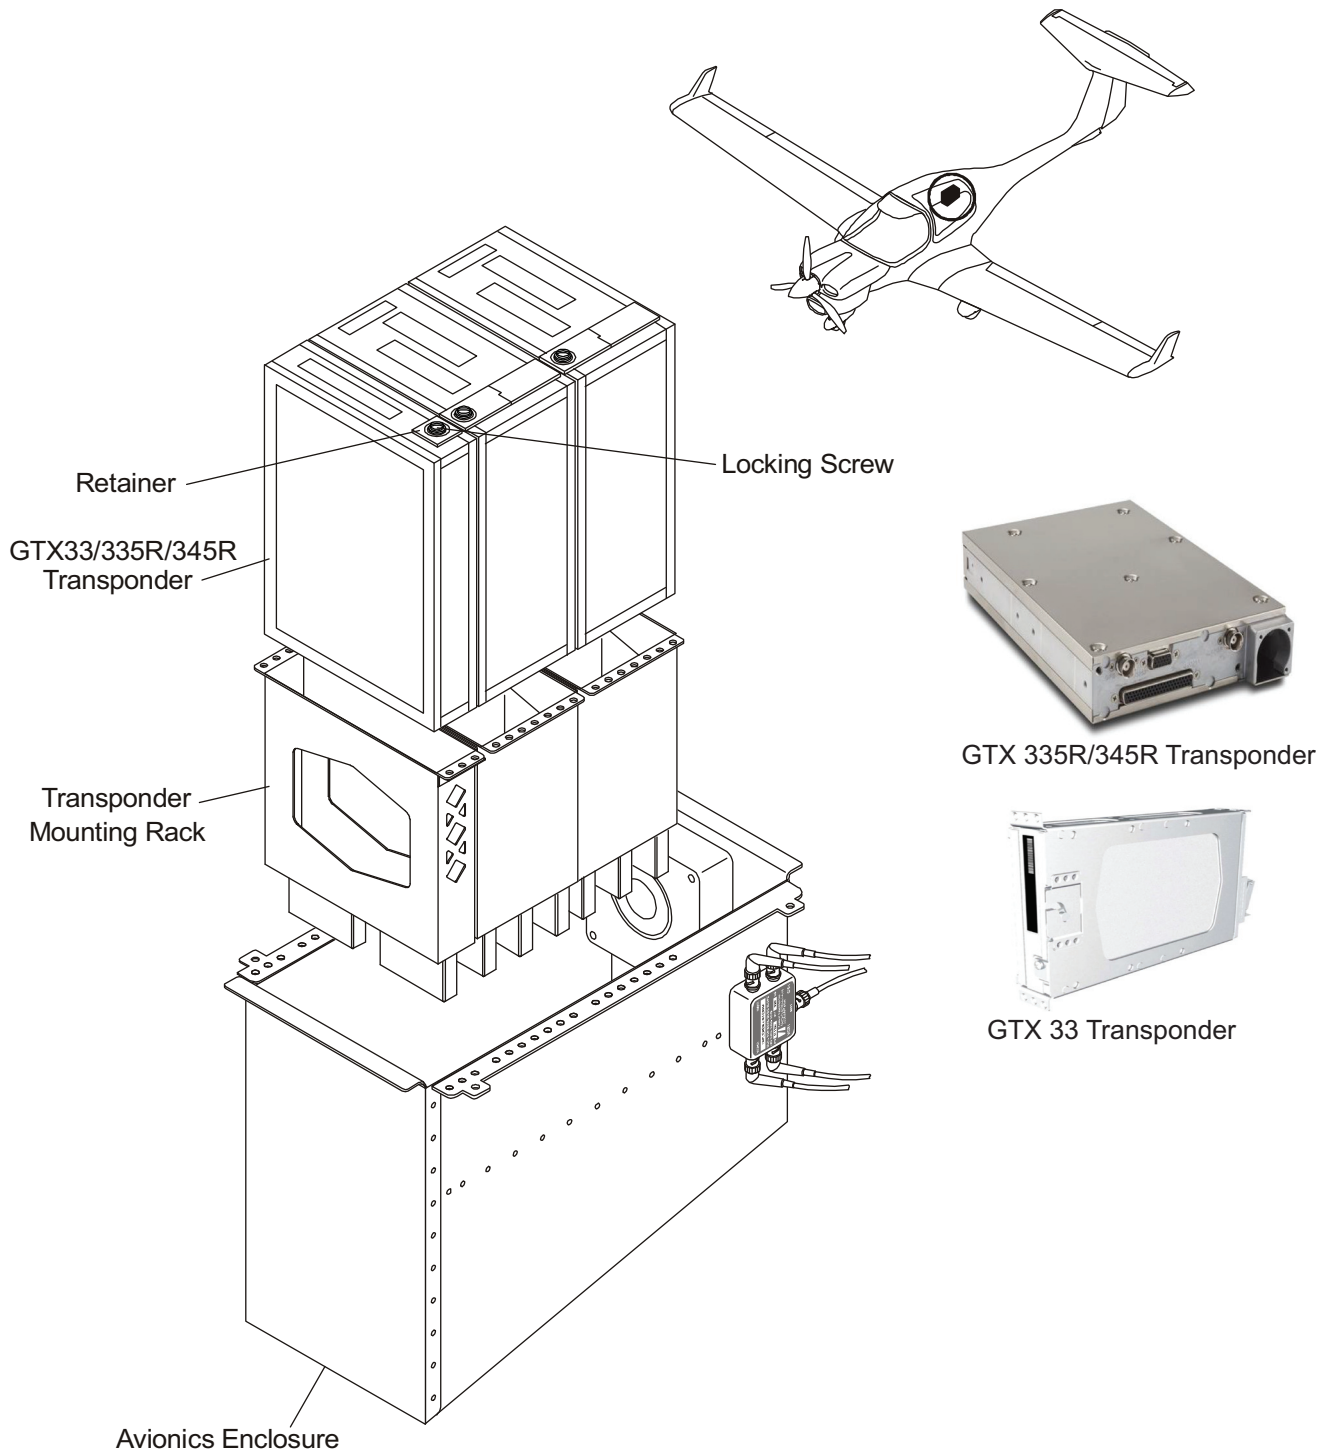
GTX33 / 335R / 345R Transponder - Removal/Installation
